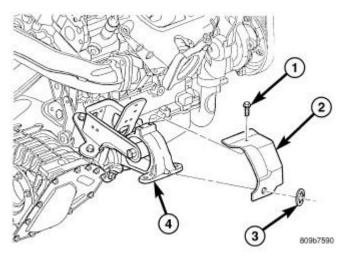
Rear Mount Heat Shield Courtesy of CHRYSLER LLC
